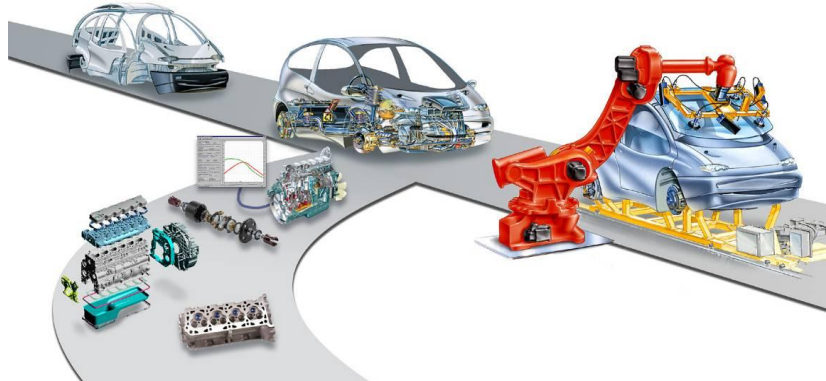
Comau's 3 Business Units: Body Welding & Assembly, Powertrain Machining & Assembly and Robotics & Service
